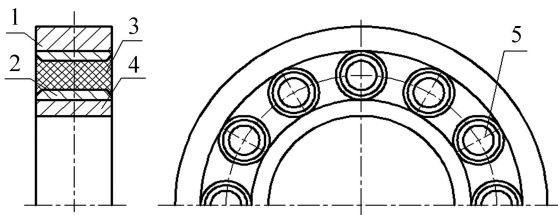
Structural drawing of elastic composite cylindrical roller bearing: 1—Bearing outer ring; 2—Deep cavity hollow rolling element; 3—Bearing inner ring; 4—Inner ring of bearing; 5—Elastic composite cylindrical rolling element
